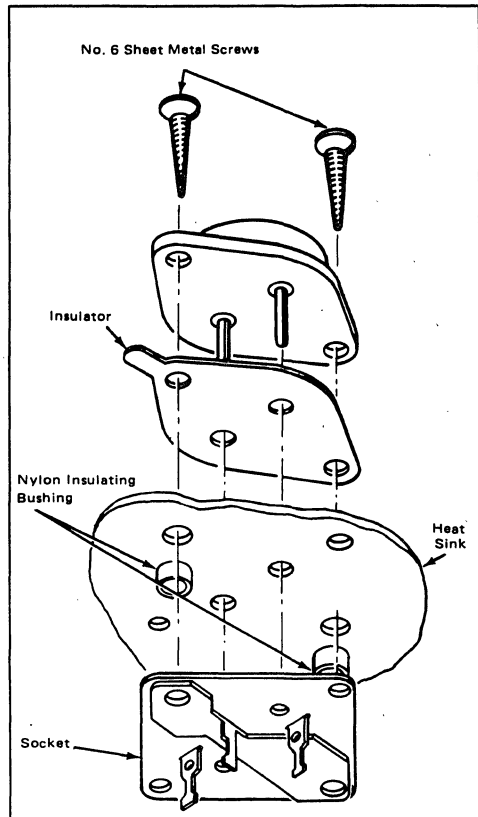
Mounting Details for Flat-Base Mounted Semiconductors (TO-3 Shown).
